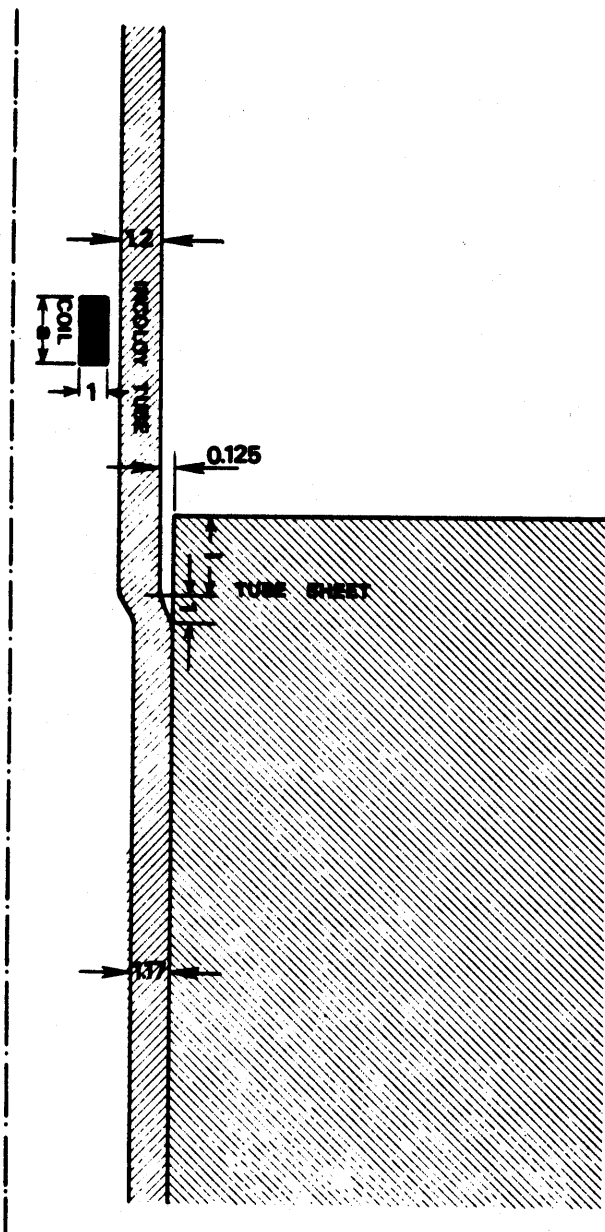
Geometry of steam generator section showing the tube sheet, tube, and coil. Dimensions are in millimeters.
